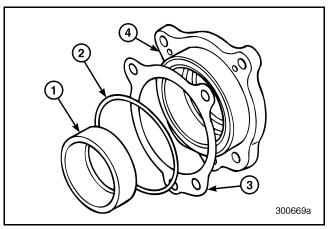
Exploded View of Rear Countershaft Bearing Cover
